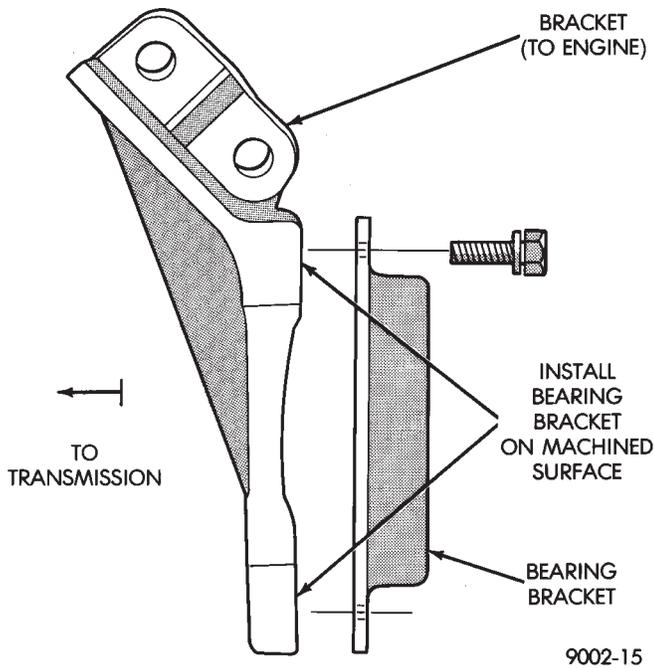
2.5L Turbo and 3.0L Intermediate Driveshaft Bracket (Typical)
